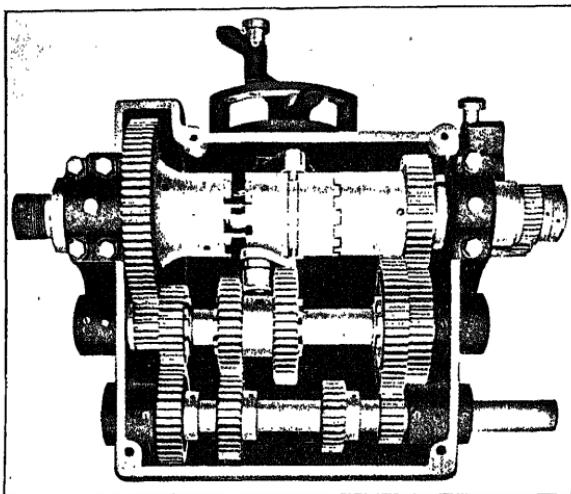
All-gearred lathe head stock. This set of trains replaces the cone pulley and back gearing in ordinary lathes. Monarch Machine Tool Company, Sidney, Ohio.
